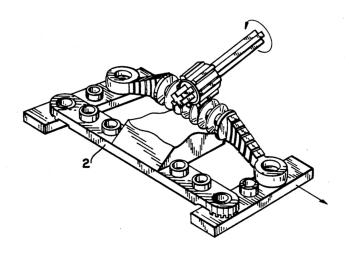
A STEERING MECHANISM FOR TOYS USING RACK AND PINION GEARS
